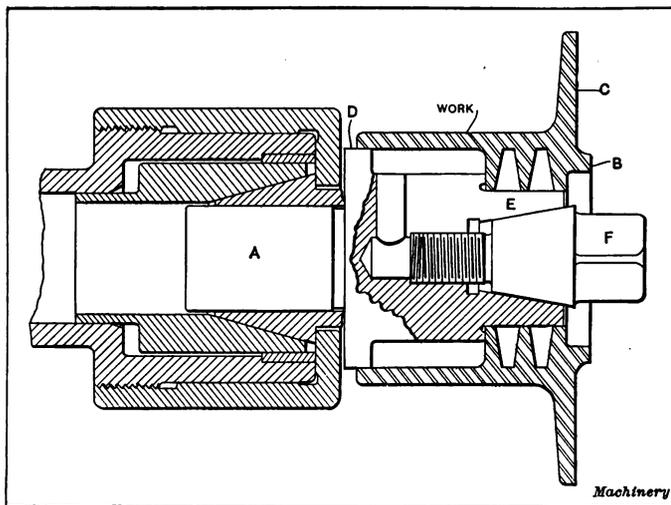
Arbor held in Collet and expanded by Internal Taper Plug
